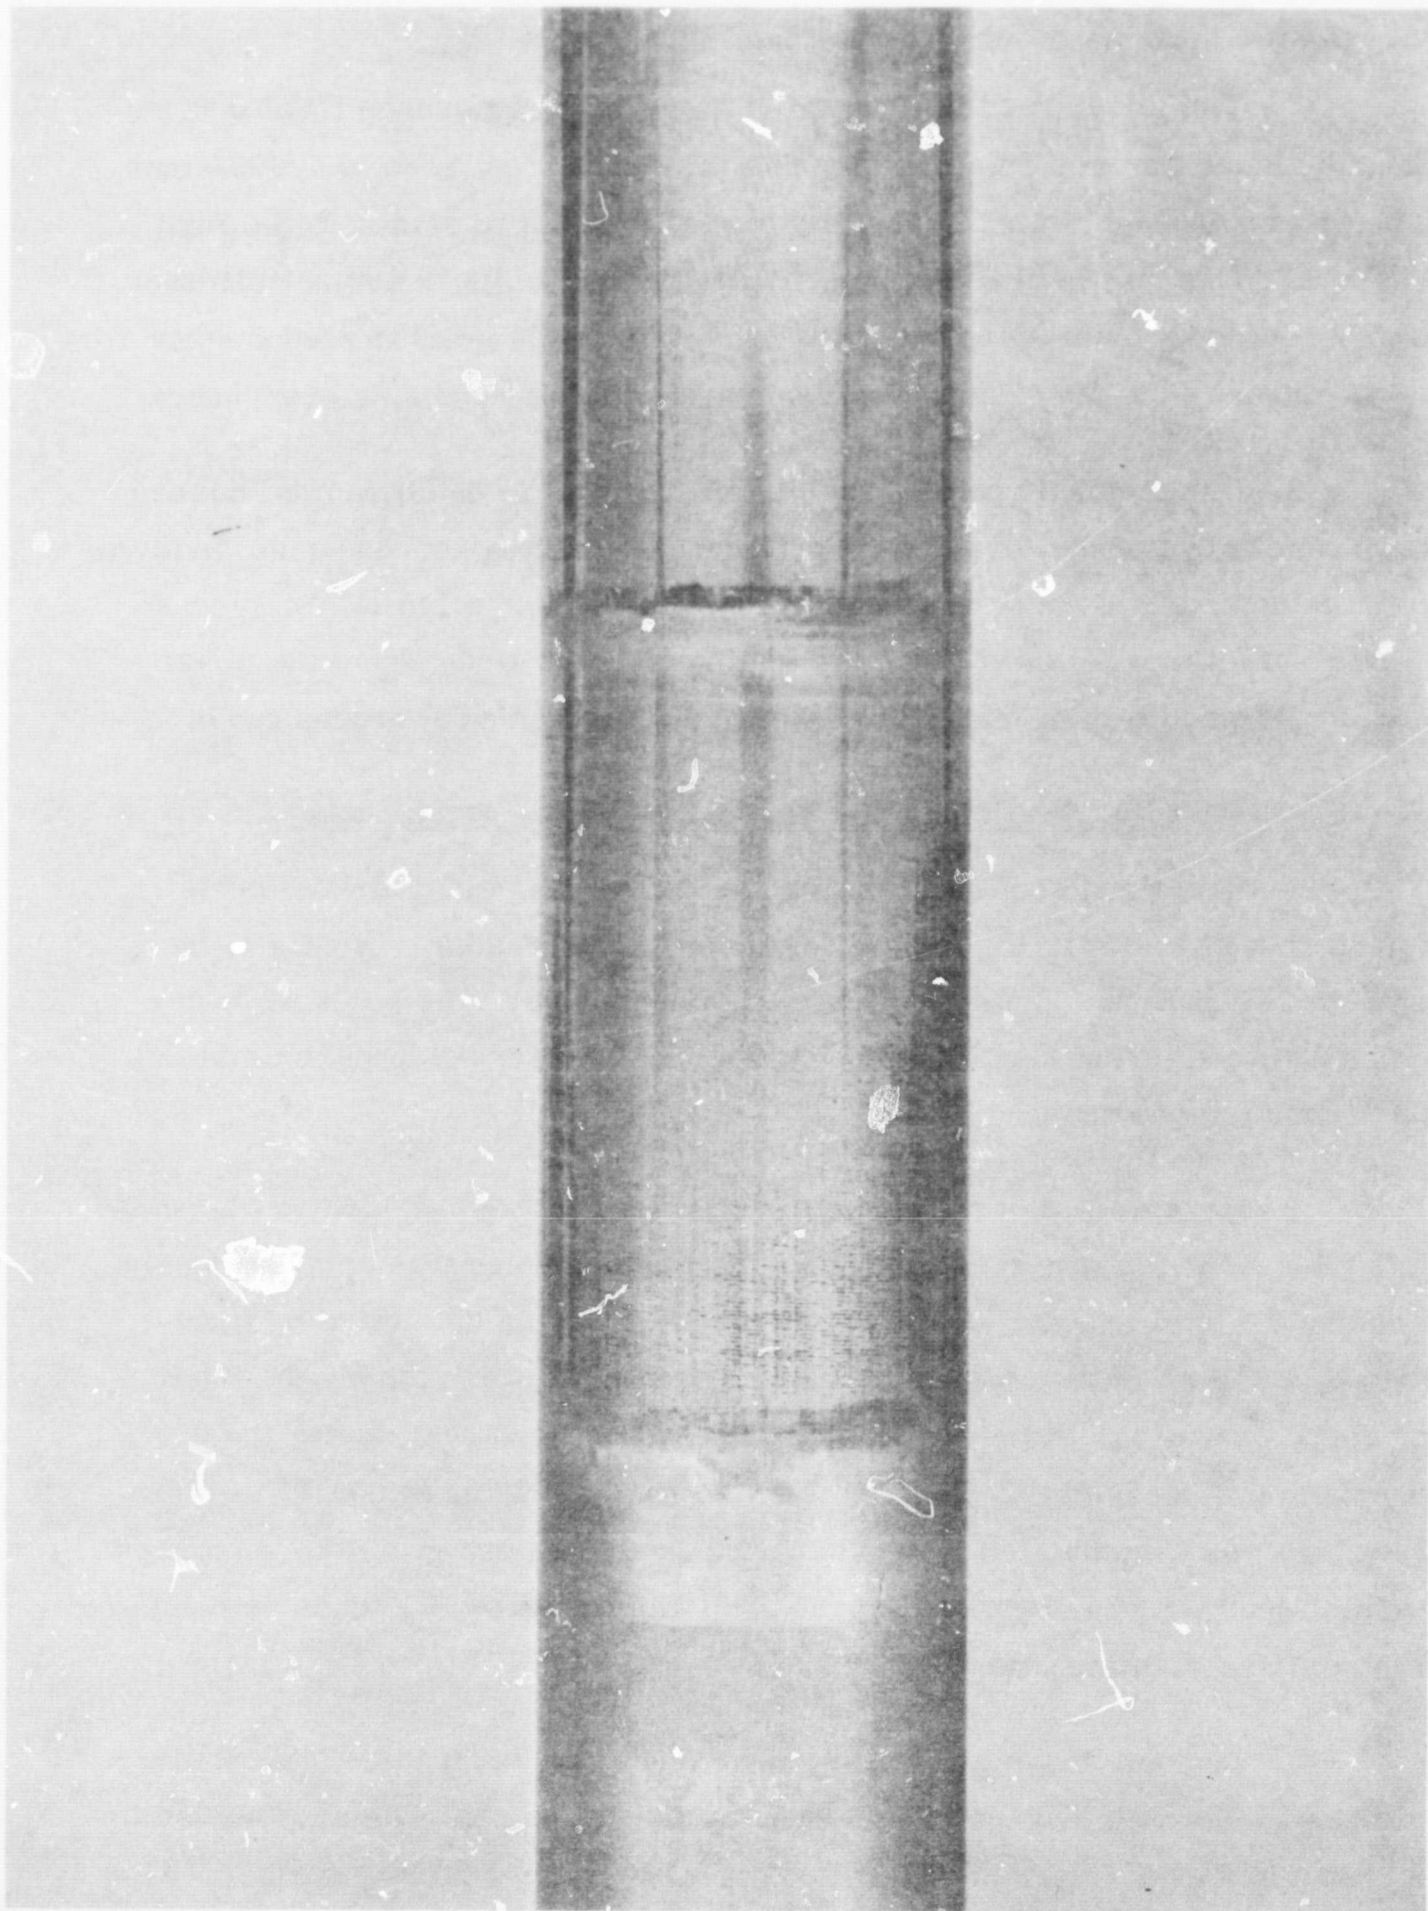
Piston Rod (B-End) One-Inch Vascojst 1000/Silver Alloy Reed Seal
